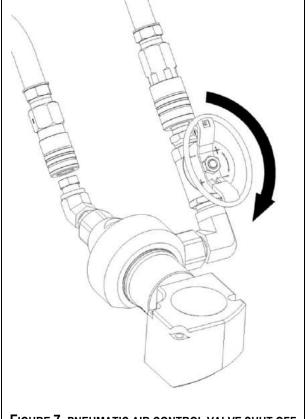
PNEUMATIC AIR CONTROL VALVE SHUT OFF
